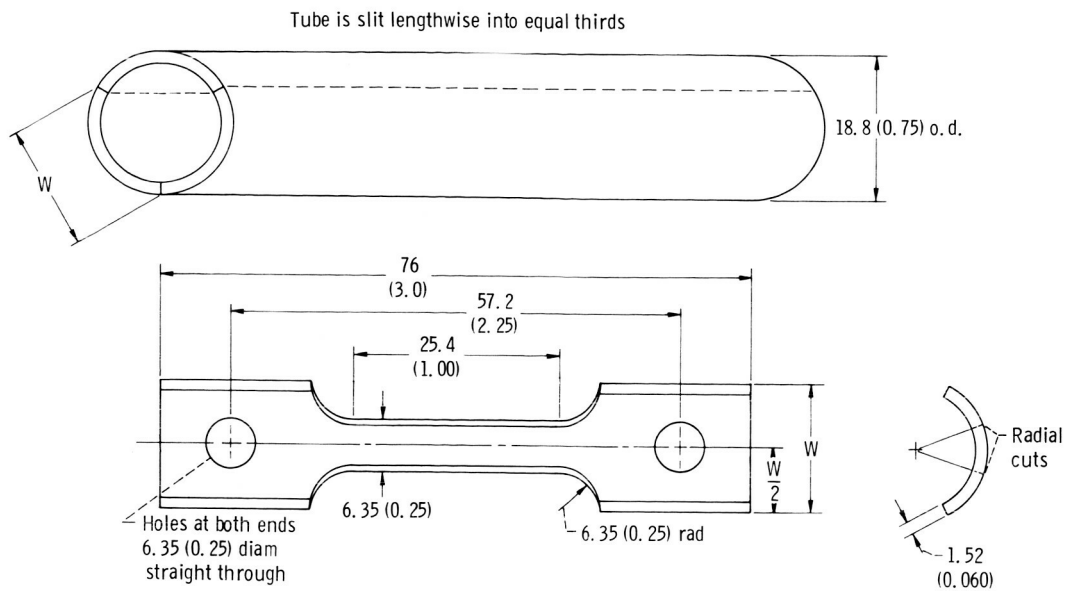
Tubing-section tensile test specimen. (Dimensions are in mm (in.).)
